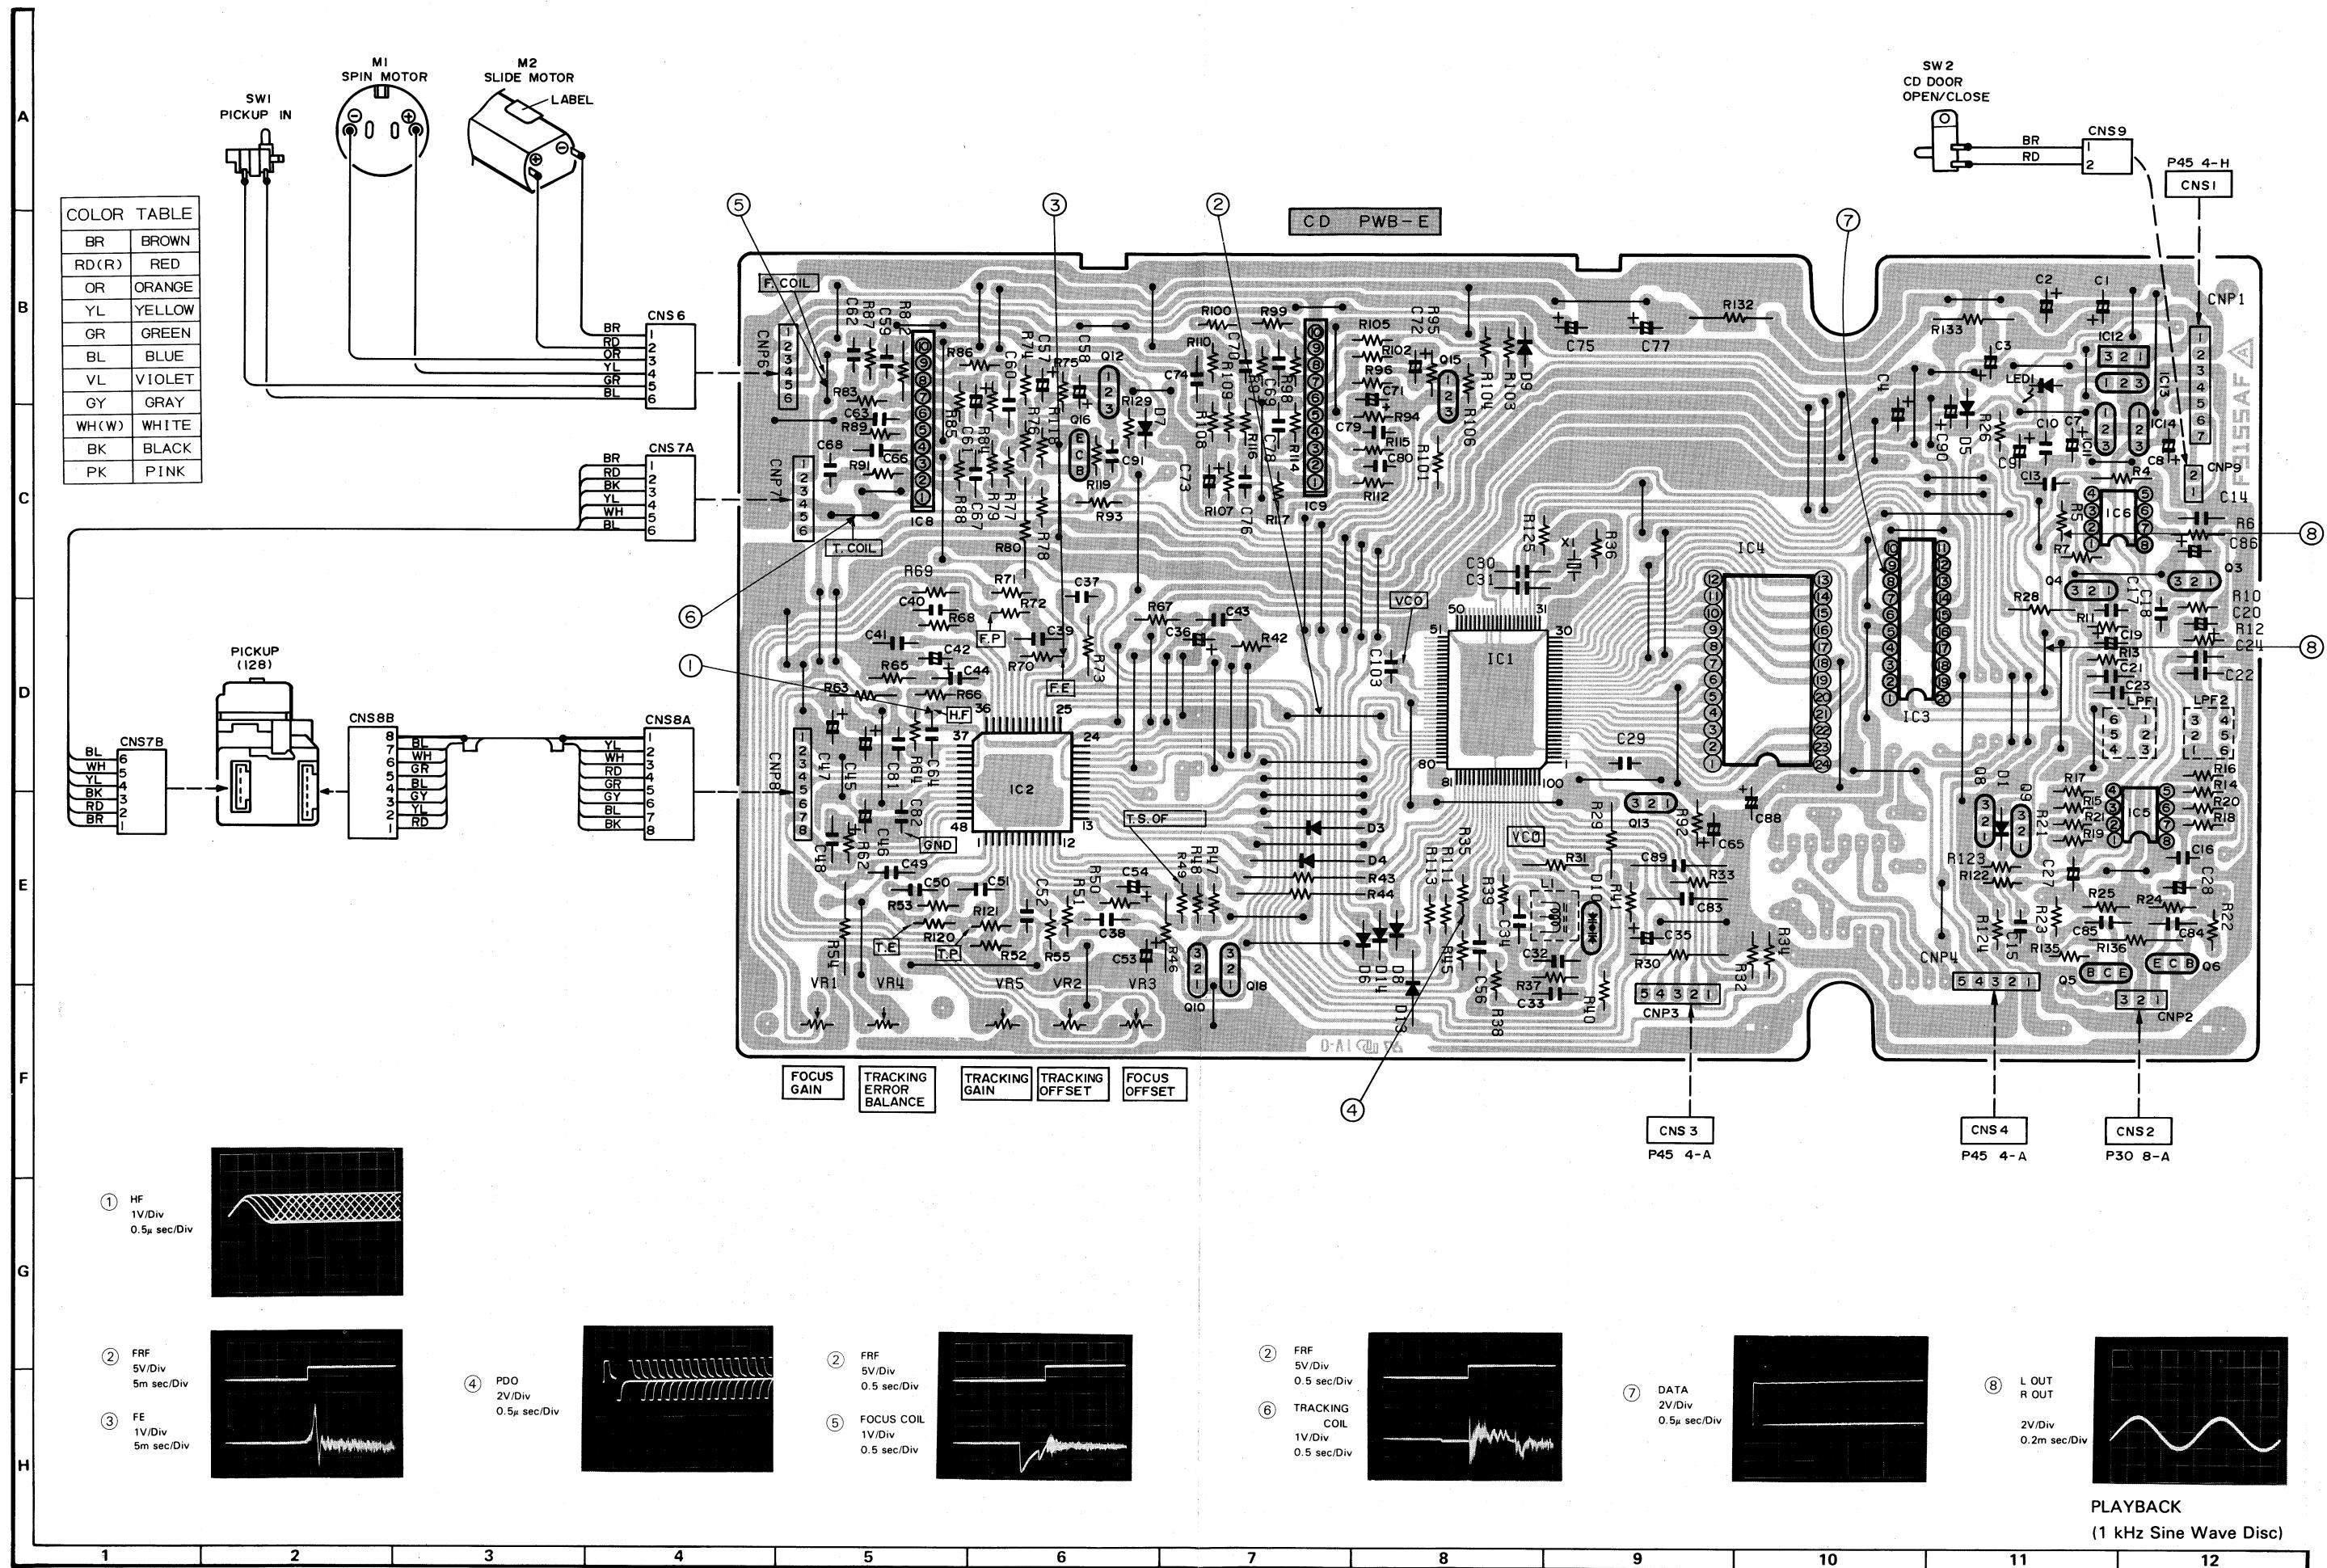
WIRING SIDE OF P.W.BOARD (5/6)
